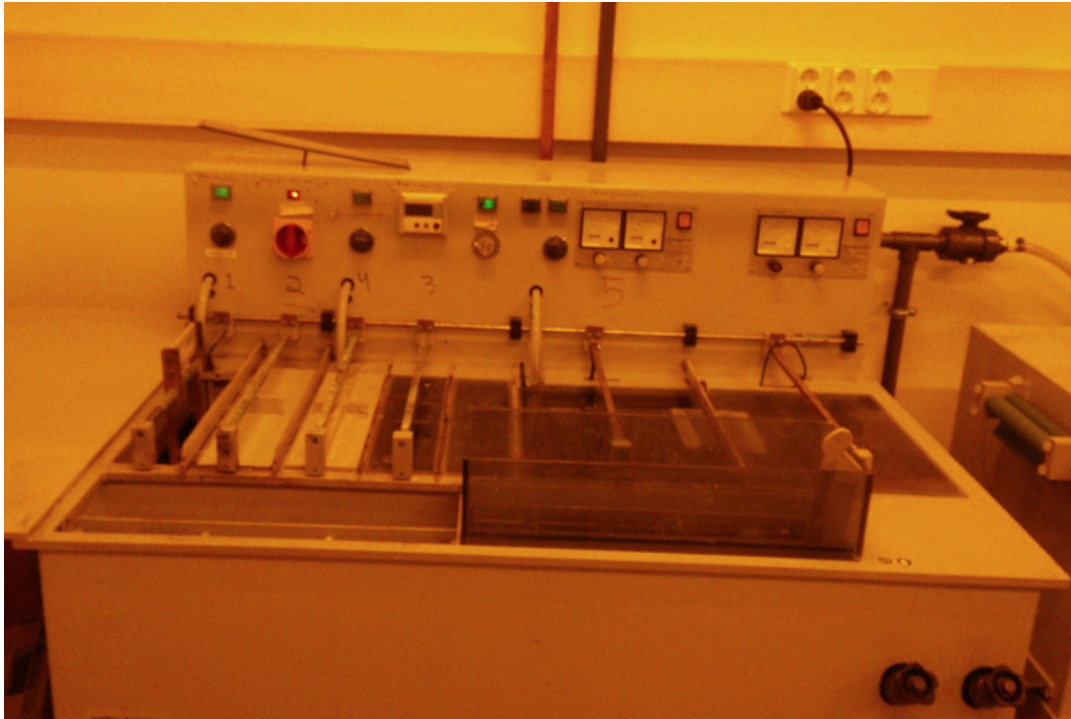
Through hole plating machine operated and modified in this work in its original stage.
